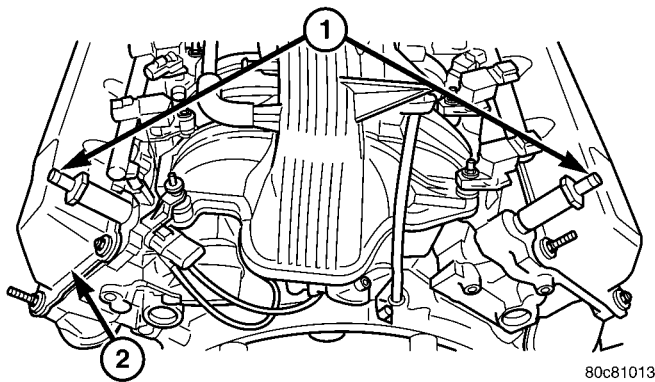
CRANKCASE BREATHERS (2) - 3.7L
